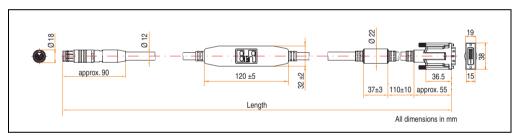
Dimensions - SDL cable with extender 5CASDL.0x00-30 Rev. < A5
